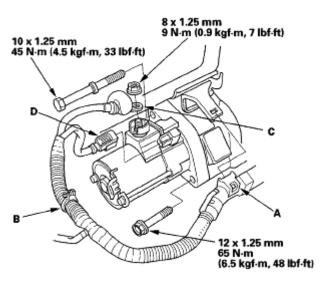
Identifying Starter, Harness Holder And Harness Clamp With Torque Specifications Courtesy of AMERICAN HONDA MOTOR CO., INC.
